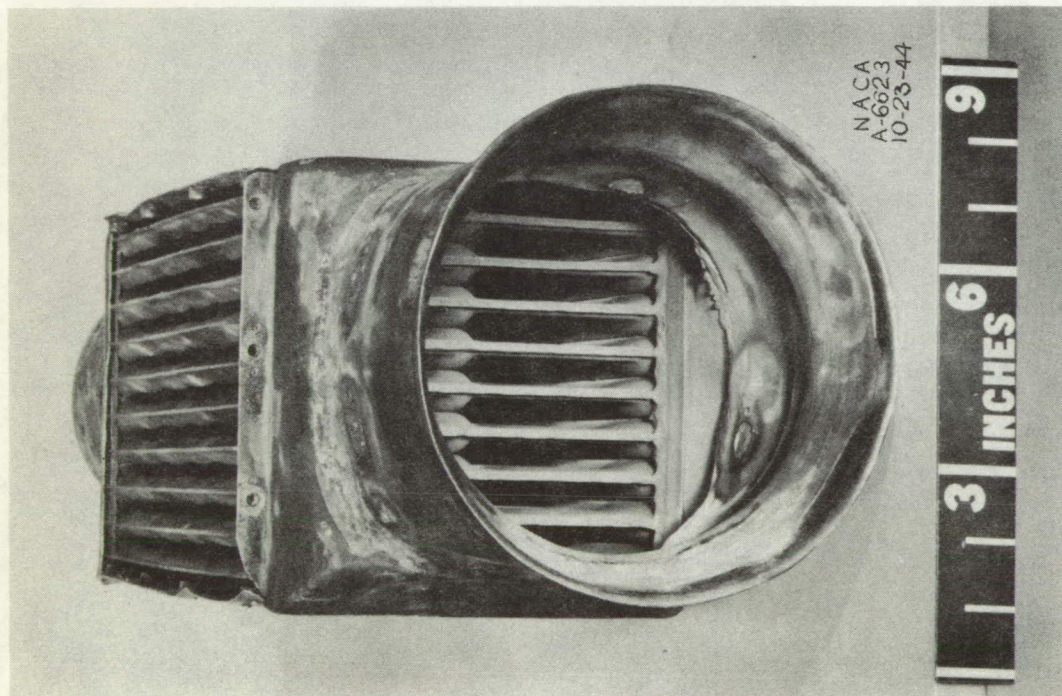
End view of heat exchanger tested showing exhaust-gas passages.
